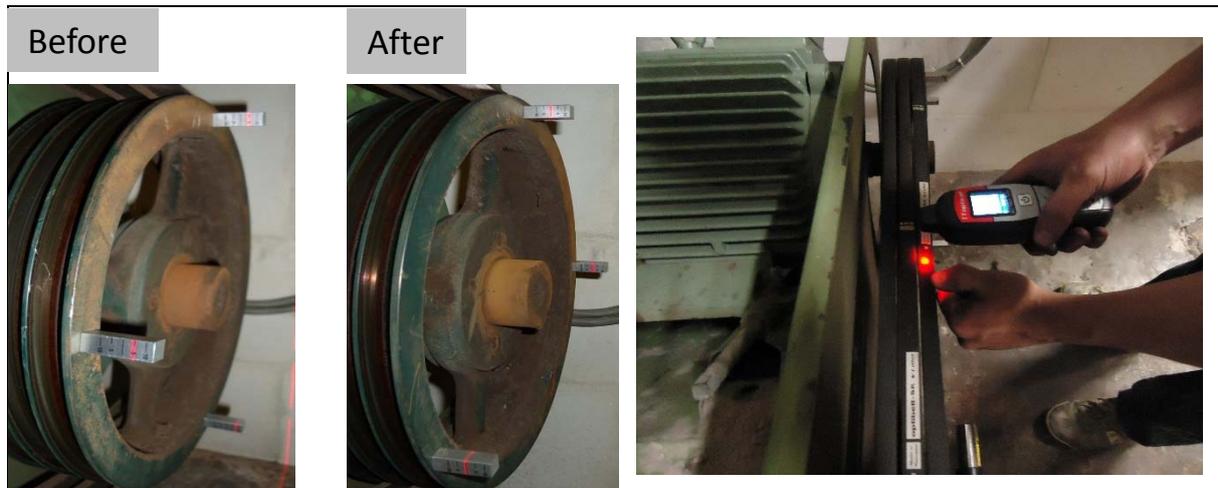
Pulley alignment and checking belt tension using adequate equipment
